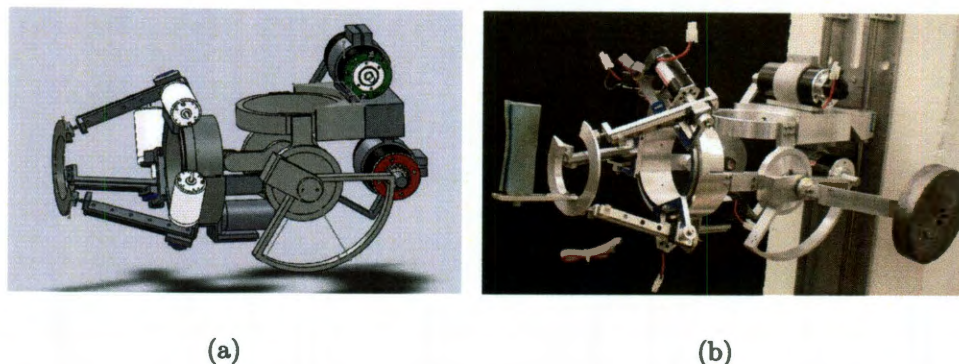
(a) CAD model of the MAHI Exo-II complete assembly. (b) Manufactured MAHI Exo-II complete assembly with motors, handle and counterweight attached.
